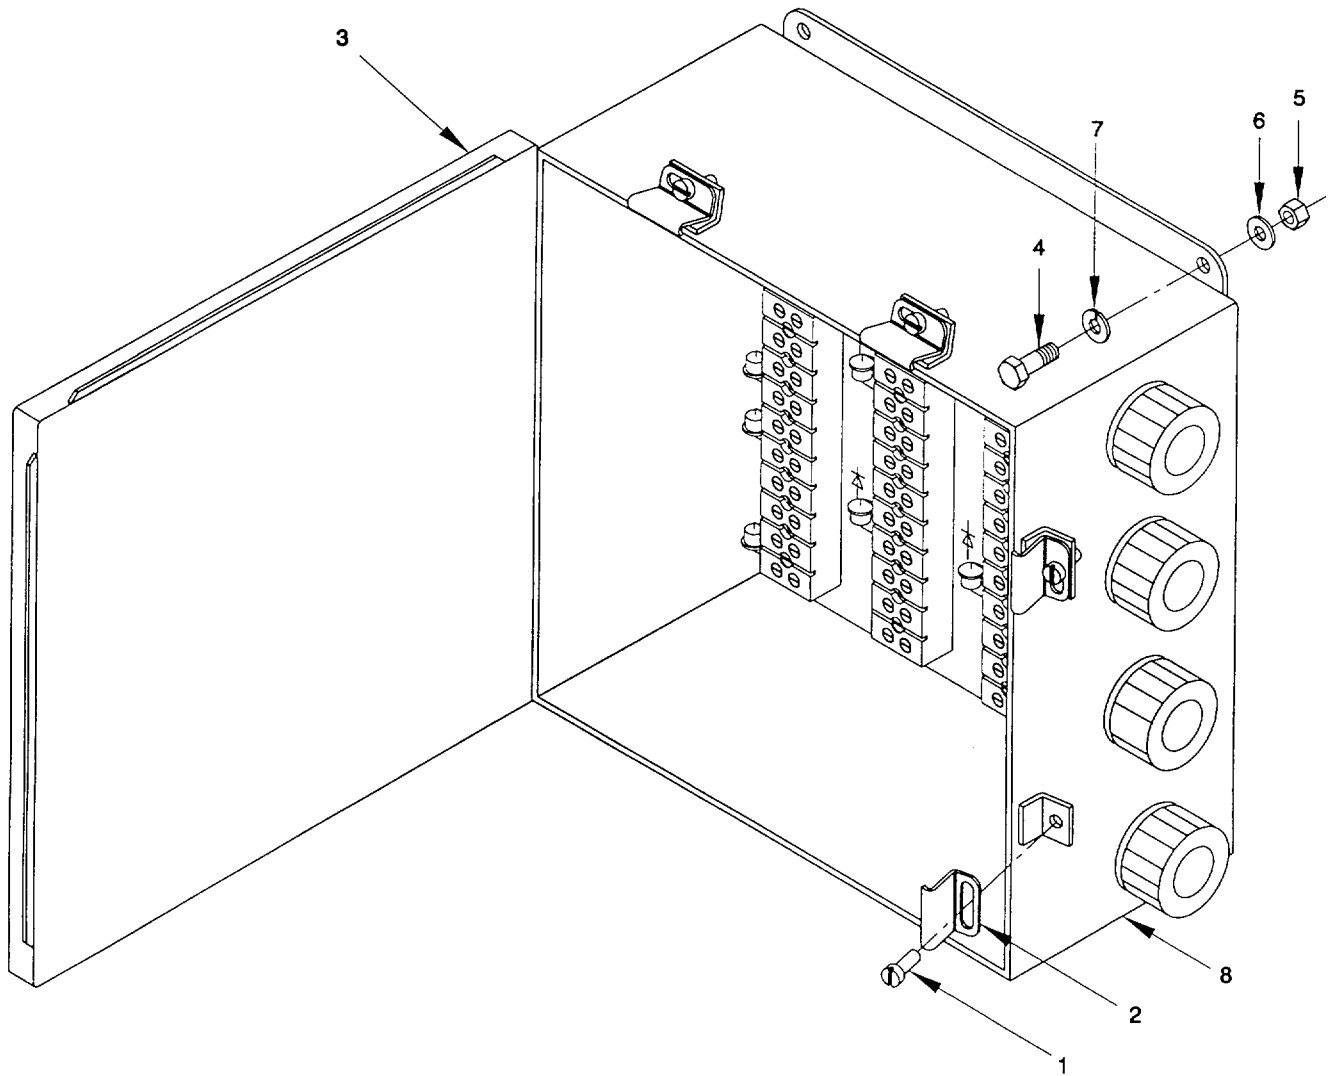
Bilge Pump Control Assembly "A5", Remove/Install
